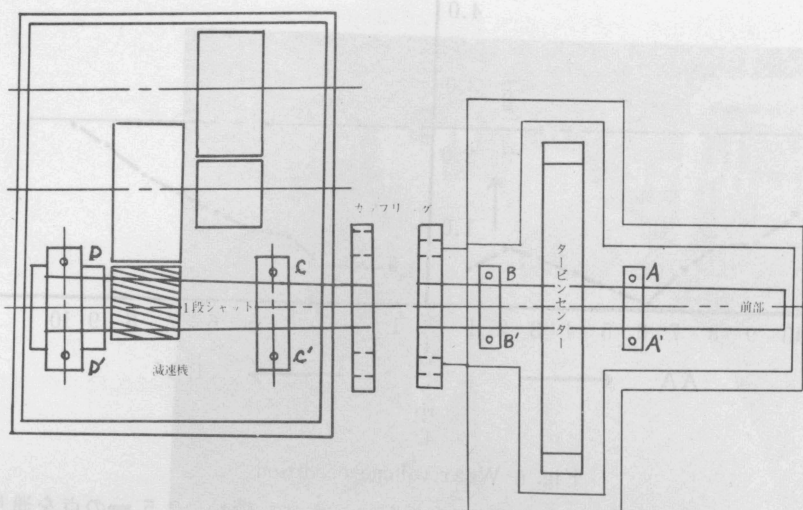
Disposition of reduction gear, turbine roter, main shaft and coupling etc.
